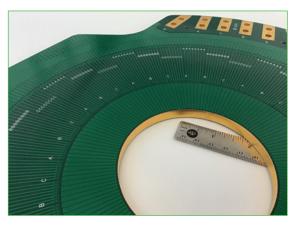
Circuit Connect applies its PCB knowledge to non-PCB products, such as this 0.320" heavy copper product with solder mark and gold edge plating ...
